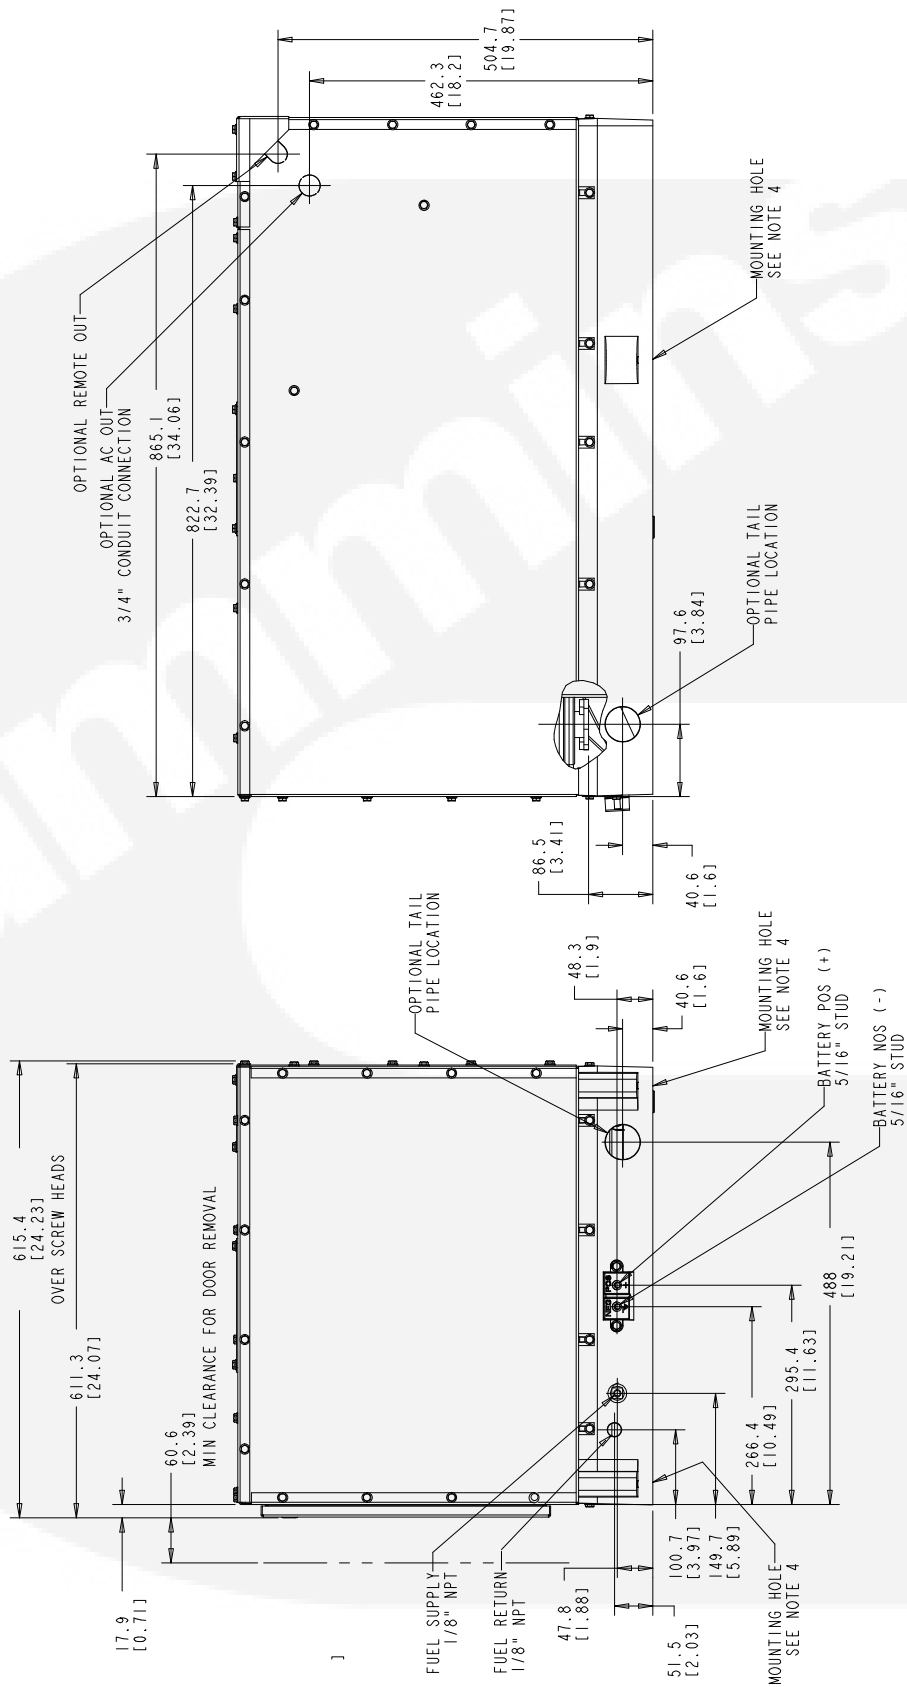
OUTLINE DRAWING—RIGHT AND BACK SIDES
